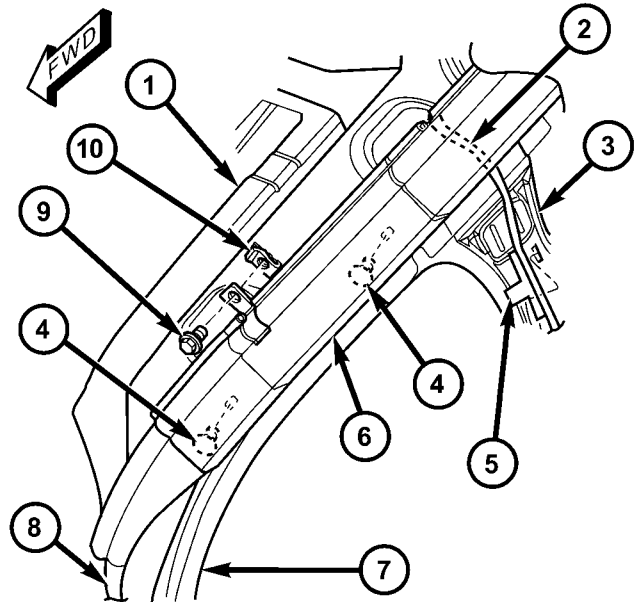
Side Curtain Airbag (Front) Remove/Install
